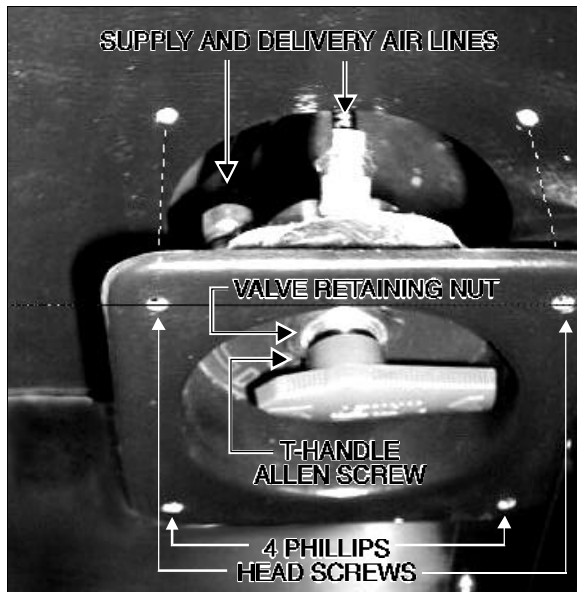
R.H. SIDE OF THE DRIVER'S HVAC UNIT ACCESS PANEL
